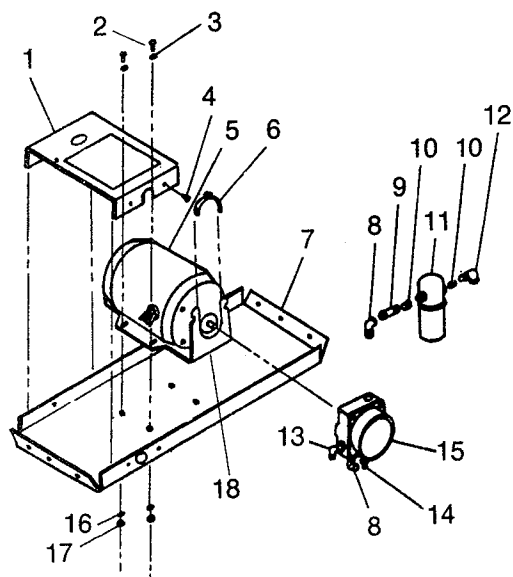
Replacement Parts Illustration for Motor and Pump Assembly
